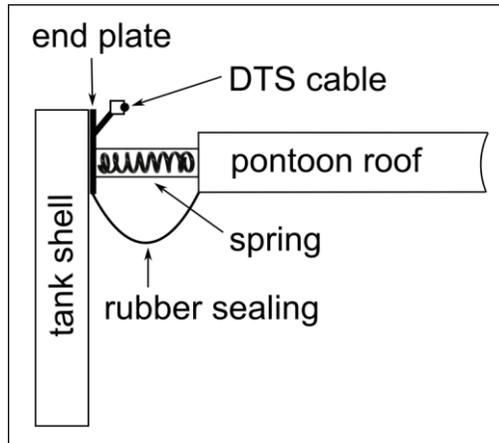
Schematic of the rim seal and the mounting of the sensor cable
